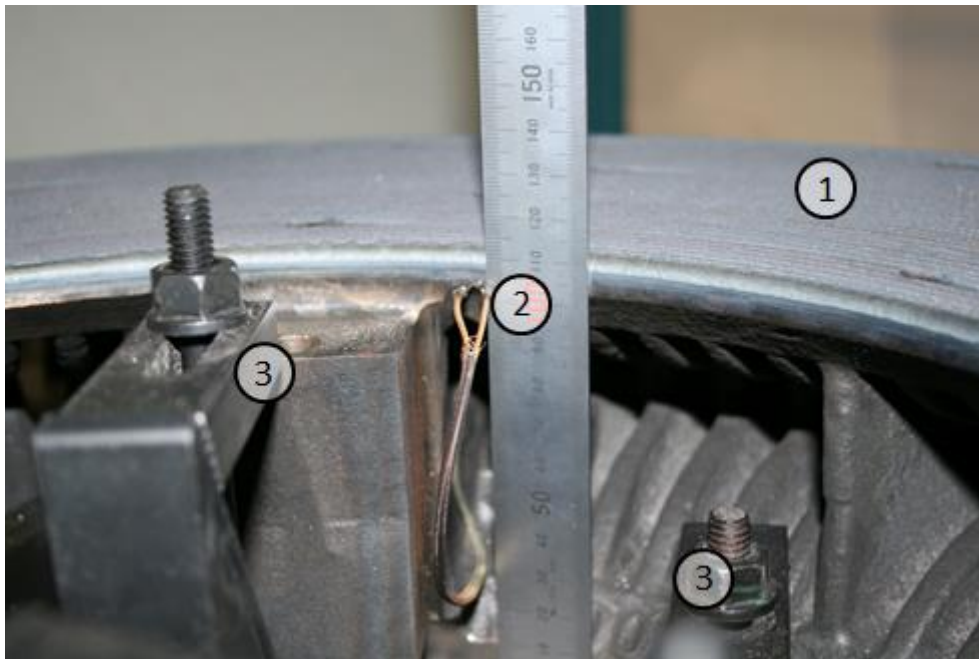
Typical temperature measurement of the brake disc during welding; Thermocouple contact; 1: brake disc wear surface; 2: thermocouple contact point (dh = 5 mm to 8 mm); 3: clamps
